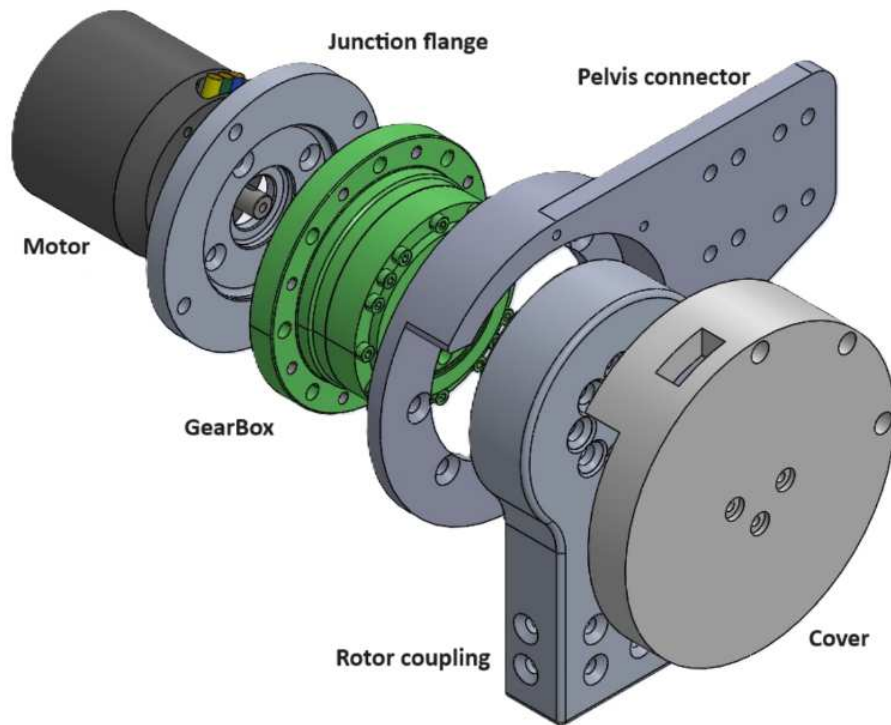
Hip joint on exploded view on 3D CAD software.
